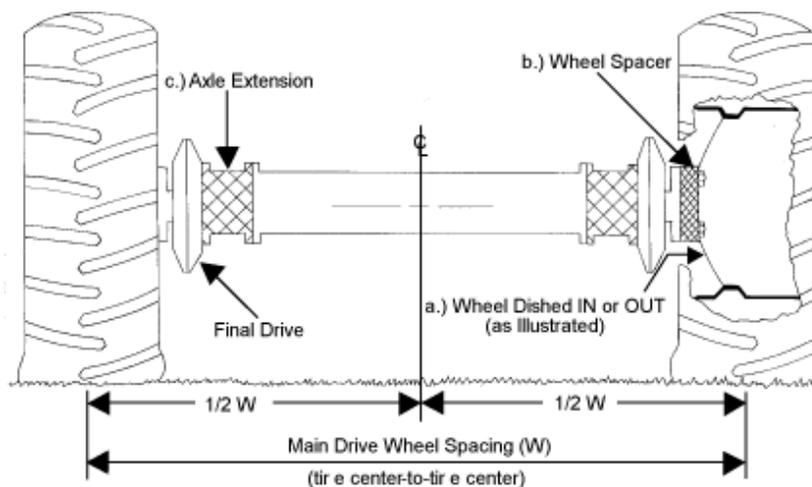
Wheel spacing adjustment for combine drive axle. Also available are: a) wheel dish "in" and "out", b) wheel or hub spacers, c) axle extensions for the final drives.
